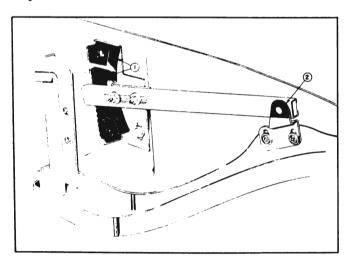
Lubrication of Folding Top Trimstick and Support Assembly
